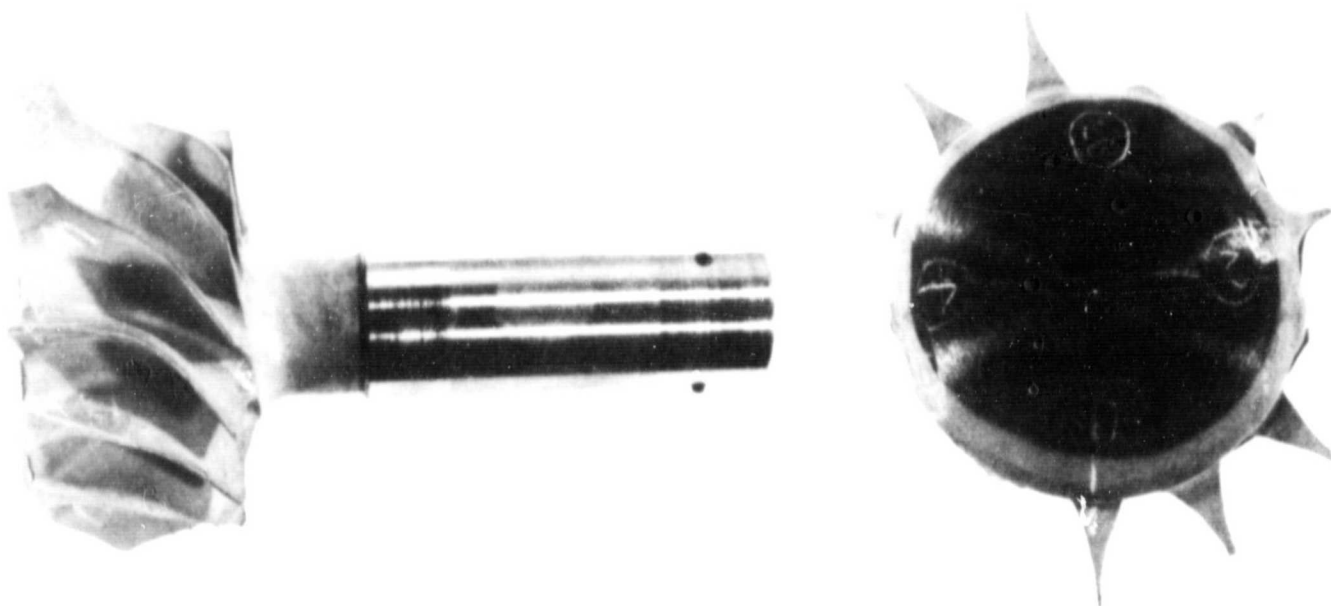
Bladed Rotor S/N 5 After Final Spin Testing to 115,100 rpm.
